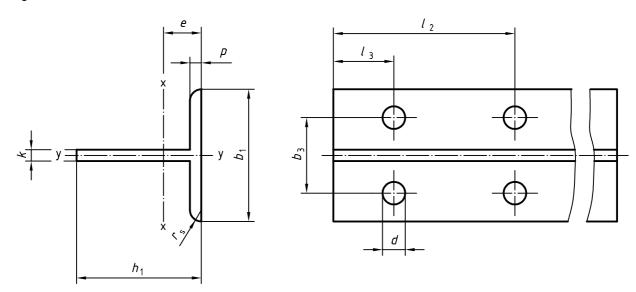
Cold drawn parallel foot and blade flange guide rail
